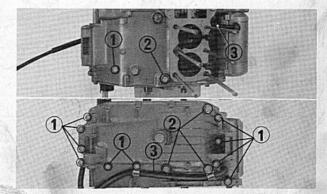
(1) 6 mm bolt (2) 8 mm bolt (3) Starting motor cable
